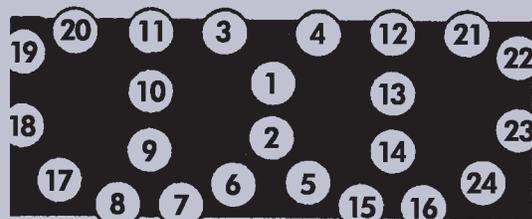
Cylinder head tightening. Ford and Mercury V8, 1949-53
